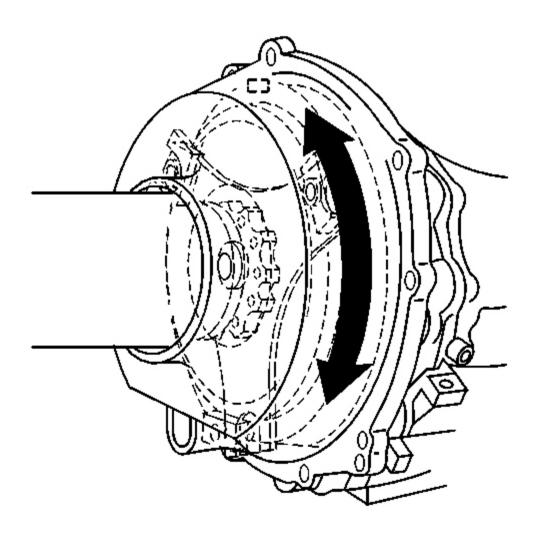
Engine Flywheel & Flexplate Courtesy of GENERAL MOTORS CORP.
